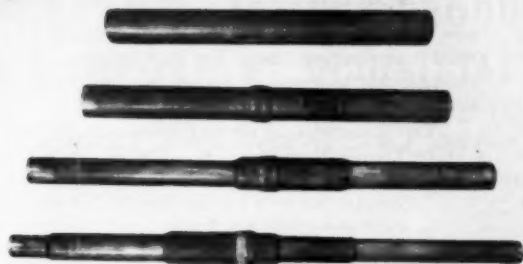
Automobile Transmission Drive Shaft Treated With Bonderite Coating and Lubricant Is Cold Formed at Molloy Mfg. Co., Detroit. Courtesy of the Parker Rust Proof Co.
